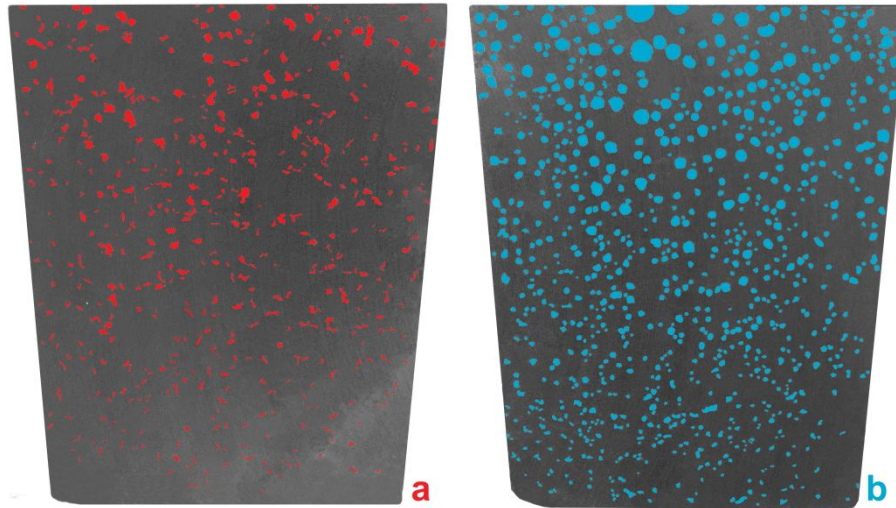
Sectioned surfaces of RPT samples: a) Melt 2; b) Melt 3
